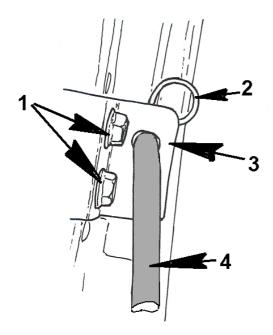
Upper Hood Torsion Bar Retaining clip and Bracket (Driver Side Shown)
